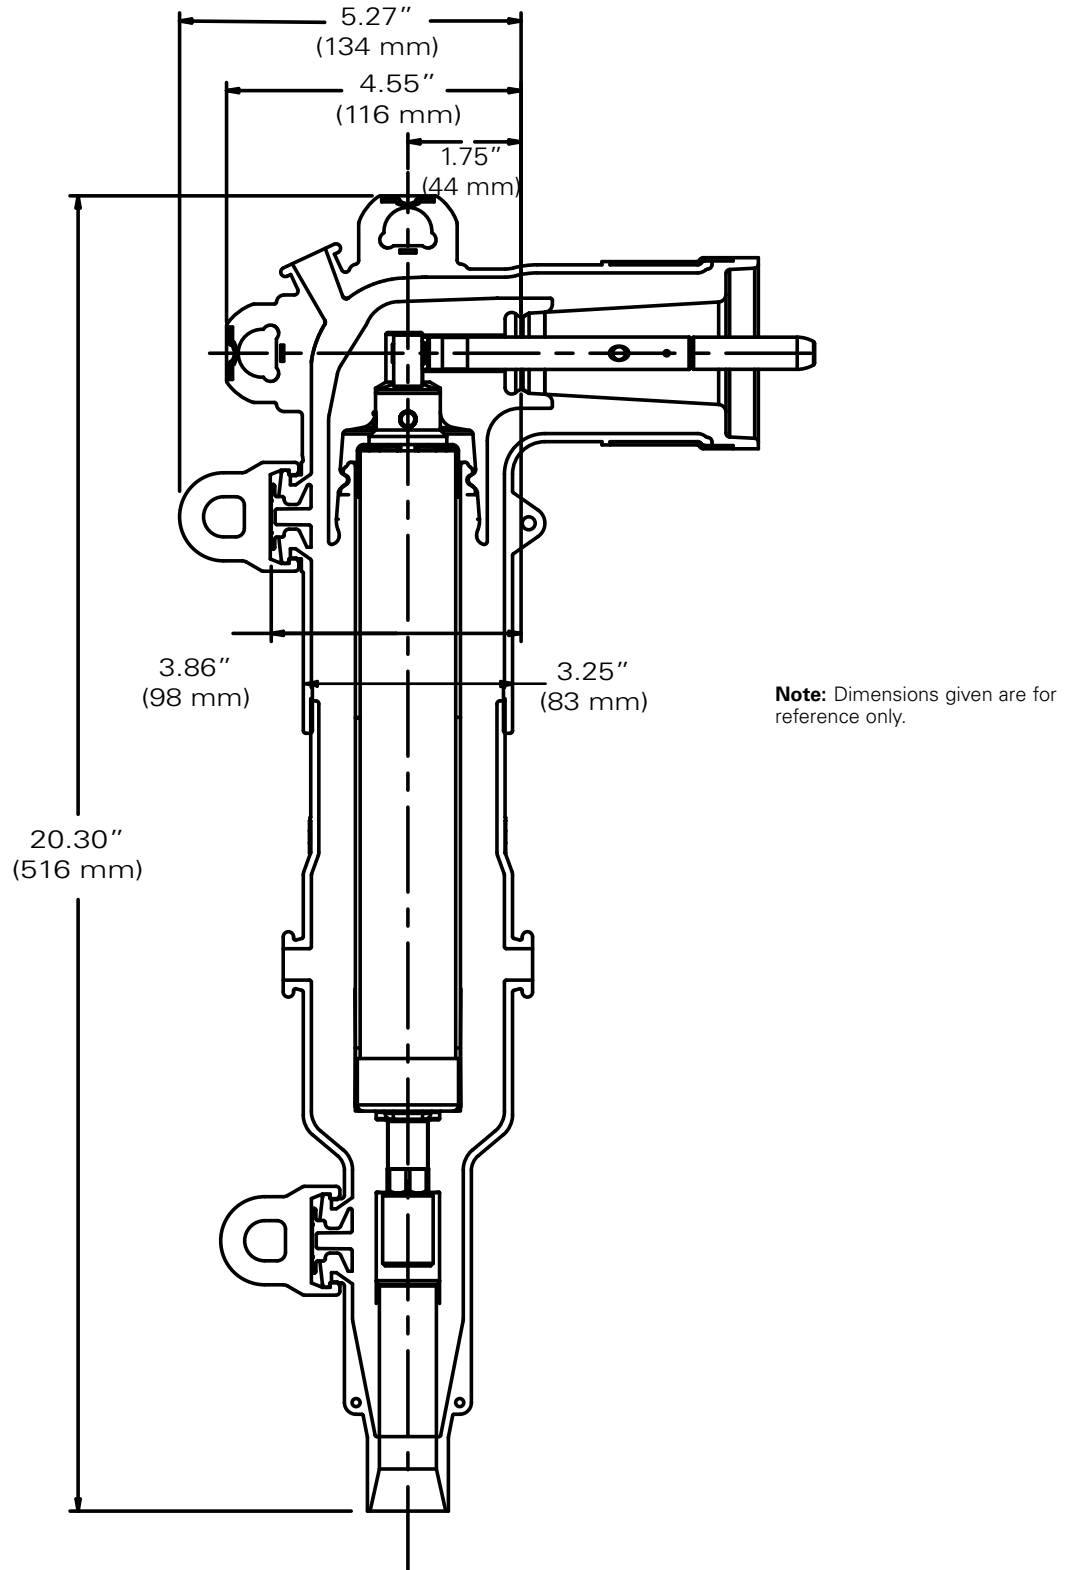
15 kV Class fused loadbreak elbow connector profile and stacking dimensions shown.
